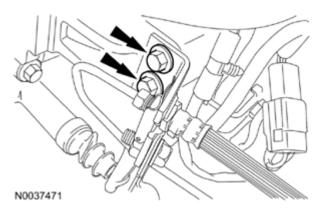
Locating Clutch Tube Bracket Bolts Courtesy of FORD MOTOR CO.
